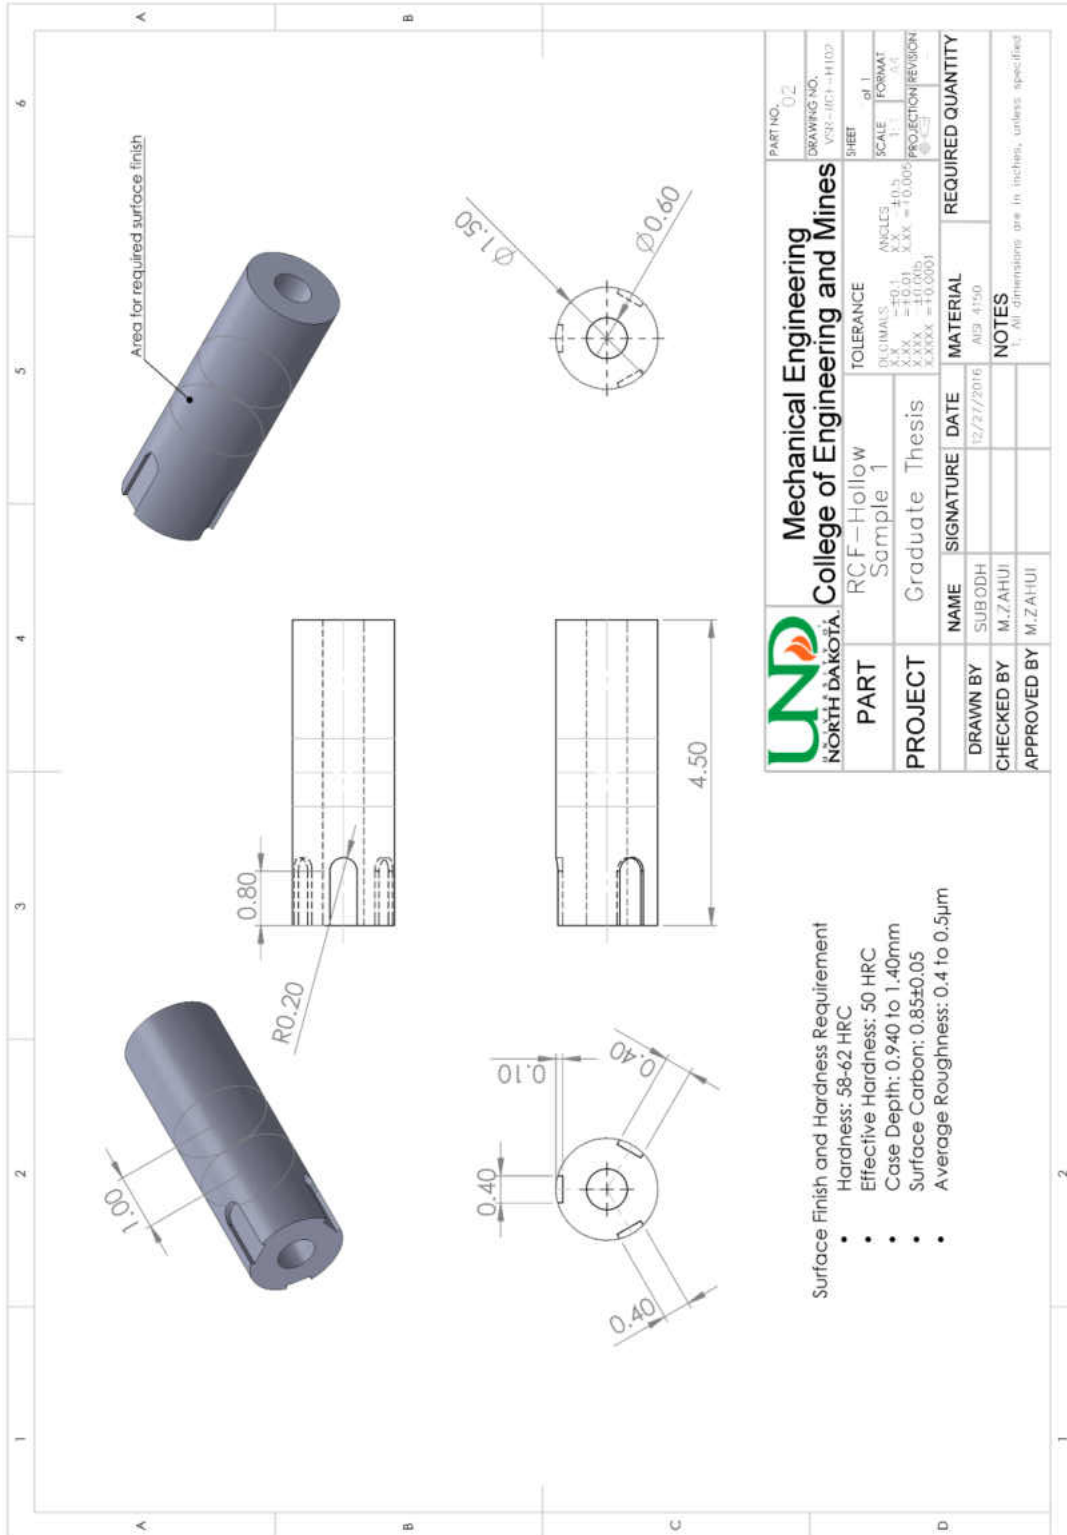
Manufacturing Drawing for RCF Testing of 40% Hollow Specimen.
